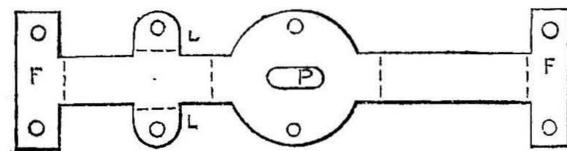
Shape of Frame cut out of Sheet Brass—F, F, Feet; L, L, Lugs to support Regulating Gear; P, Piston Guide.
